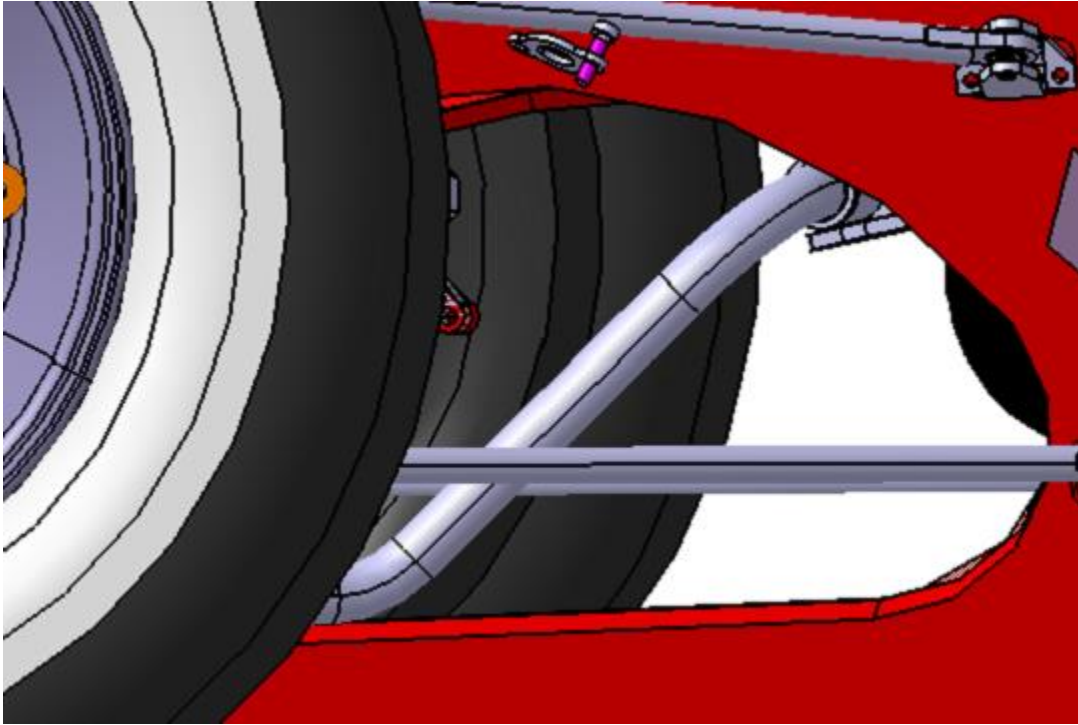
Aluminum water line, second radiator to engine inlet, view of engine inlet.
